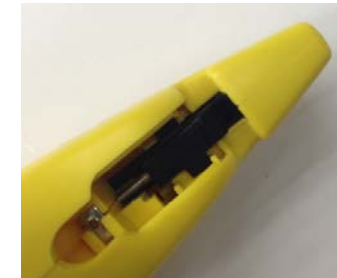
Take the back plate and put it back on the LED Keeper and screw it back together with your Phillips screwdriver. Be careful as to not over tighten and strip the screw.
